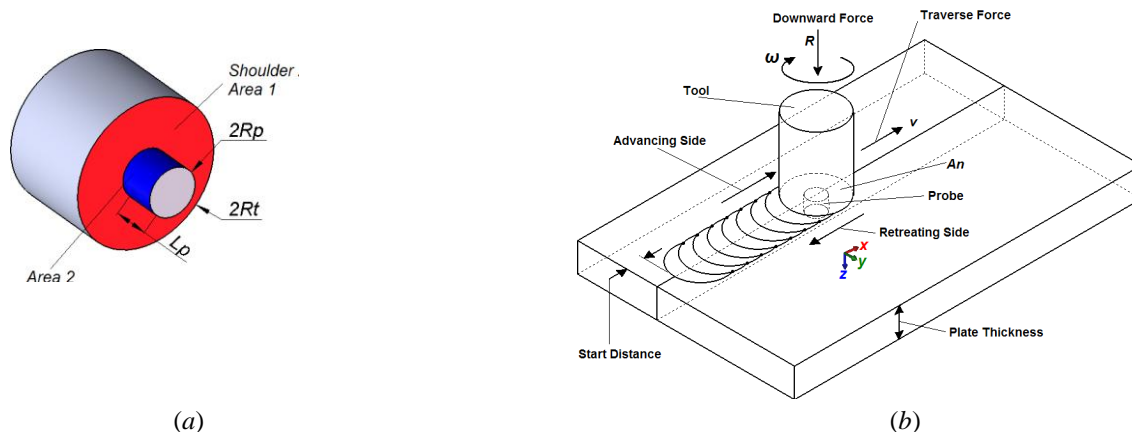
FSW process: (a) welding tool geometry and (b) FSW process parameters.
